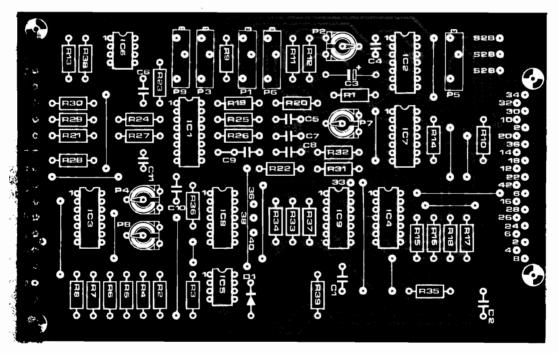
The printed circuit board and component layout for the VCO module. A minor printing error occurred on the component overlay.
